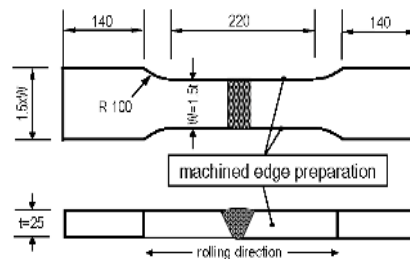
Butt weld specimens (thickness 25 mm)
